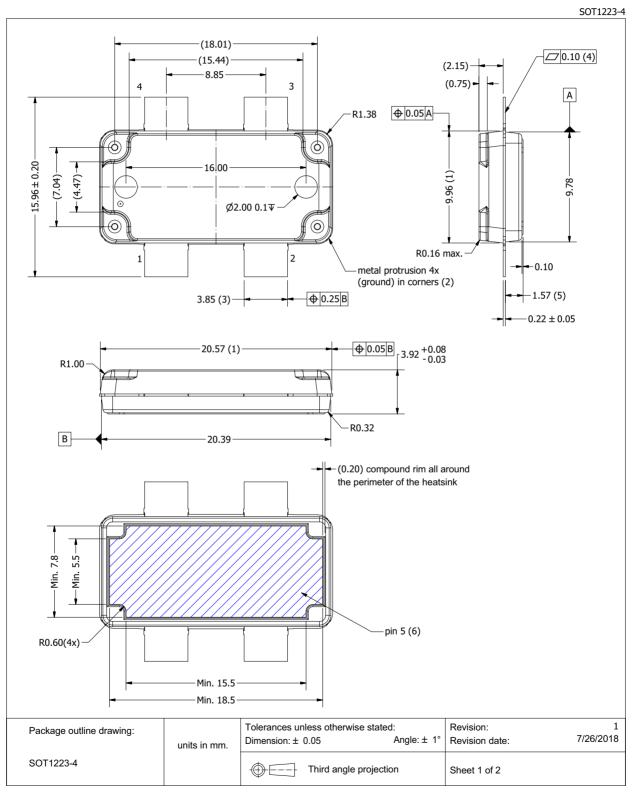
Package outline SOT1223-4 (sheet 1 of 2)
